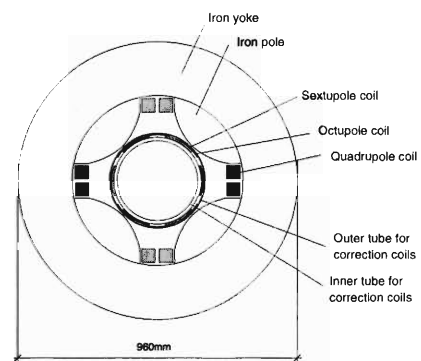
Cross section of prototype superferric quadrupole magnet (B).
